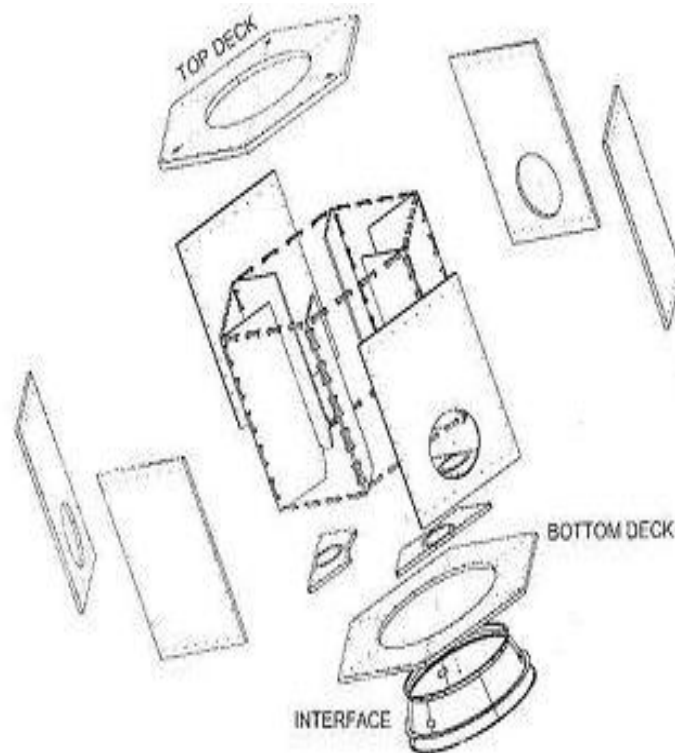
Exploded view of spacecraft structure showing base / interface ring
